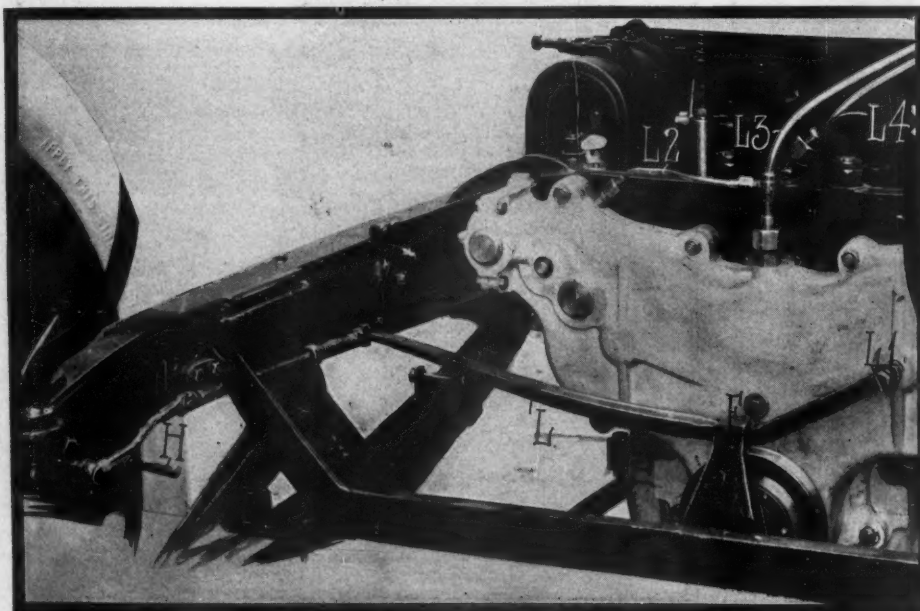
FRONT END OF MOTOR SHOWING OIL LEADS TO TIMING GEARS
